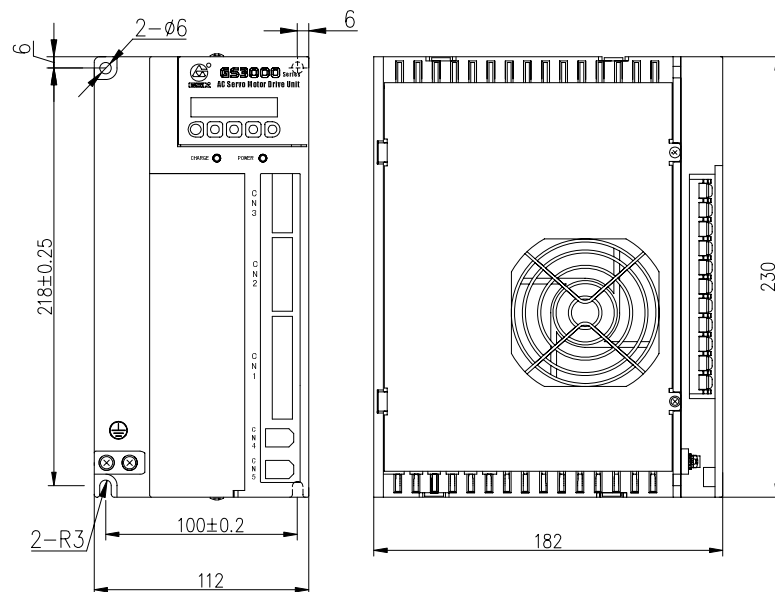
GS3048, GS4048 Series installation dimension (Unit: mm)
